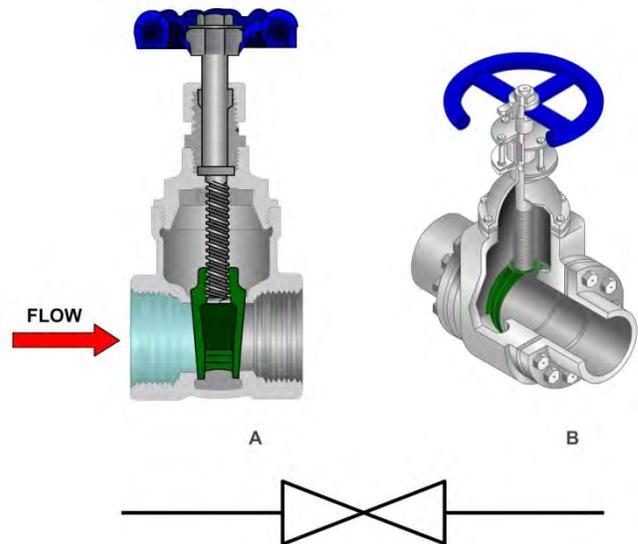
Cutaway view of a gate stop valve (rising stem).
